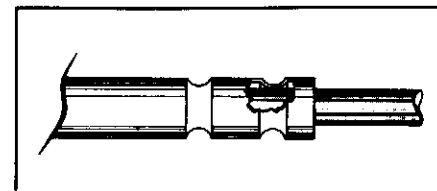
Use the new roller to groove the larger tube of a slip joint. This reduces the tube's inner diameter slightly to provide a snug fit with a smaller tube.
